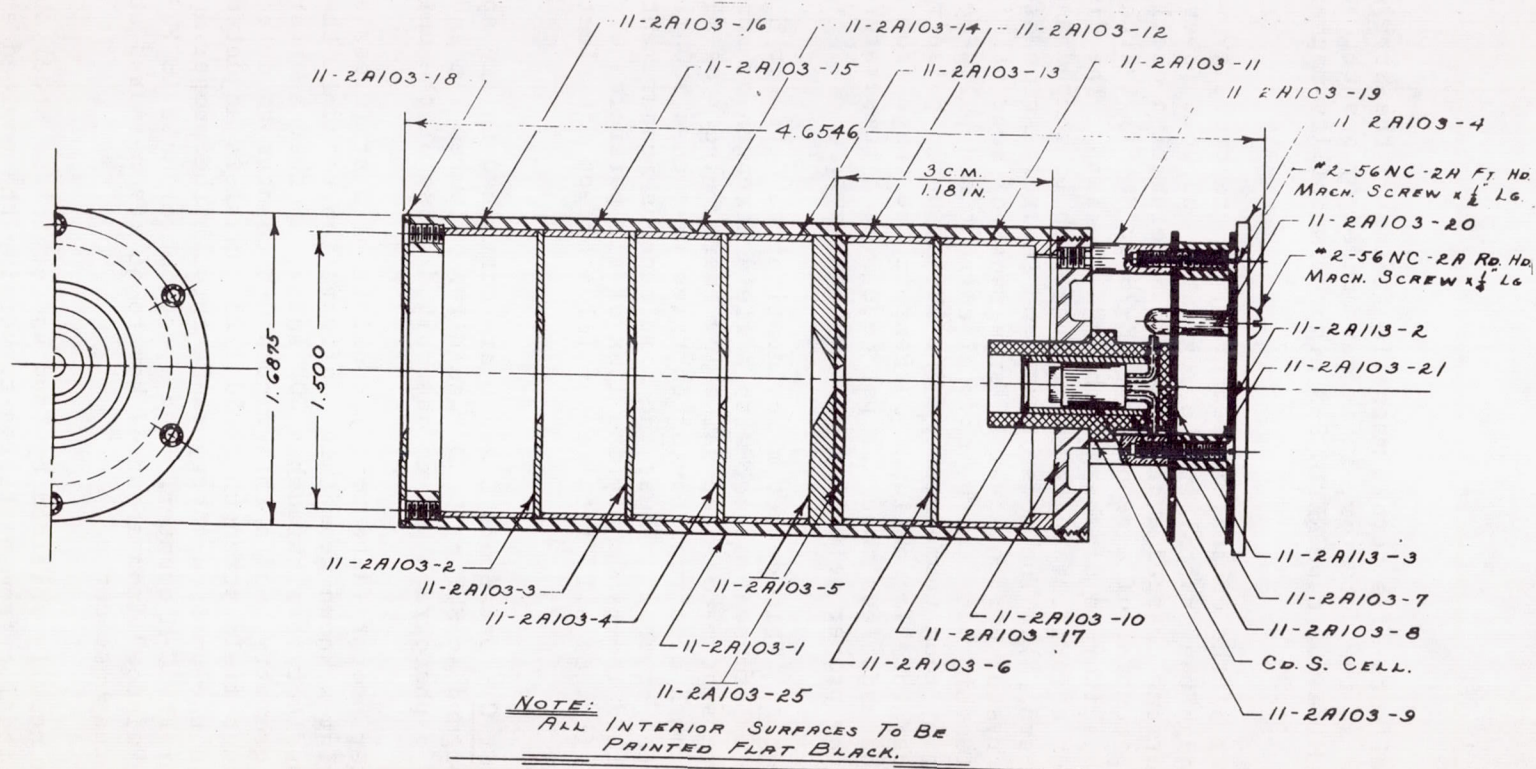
ASSEMBLY DRAWING OF CADMIUM SULFIDE DETECTOR B
